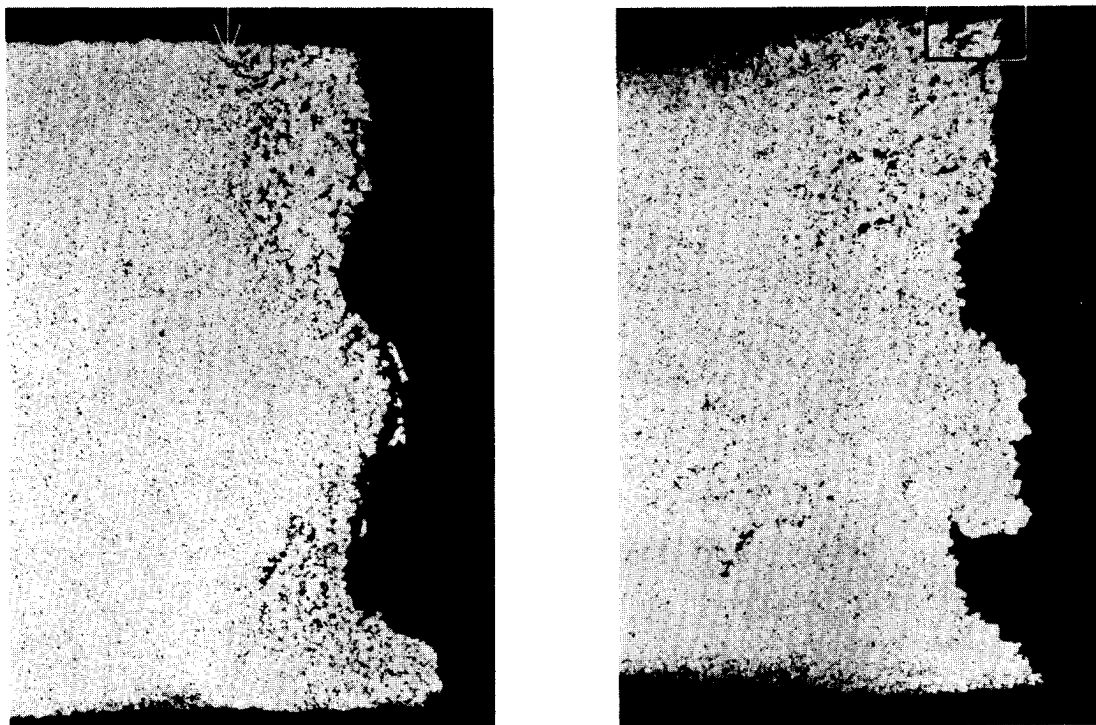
Cross-sections of fracture in pulley bracket casting showing localized areas of porosity close to fracture face (10x).
